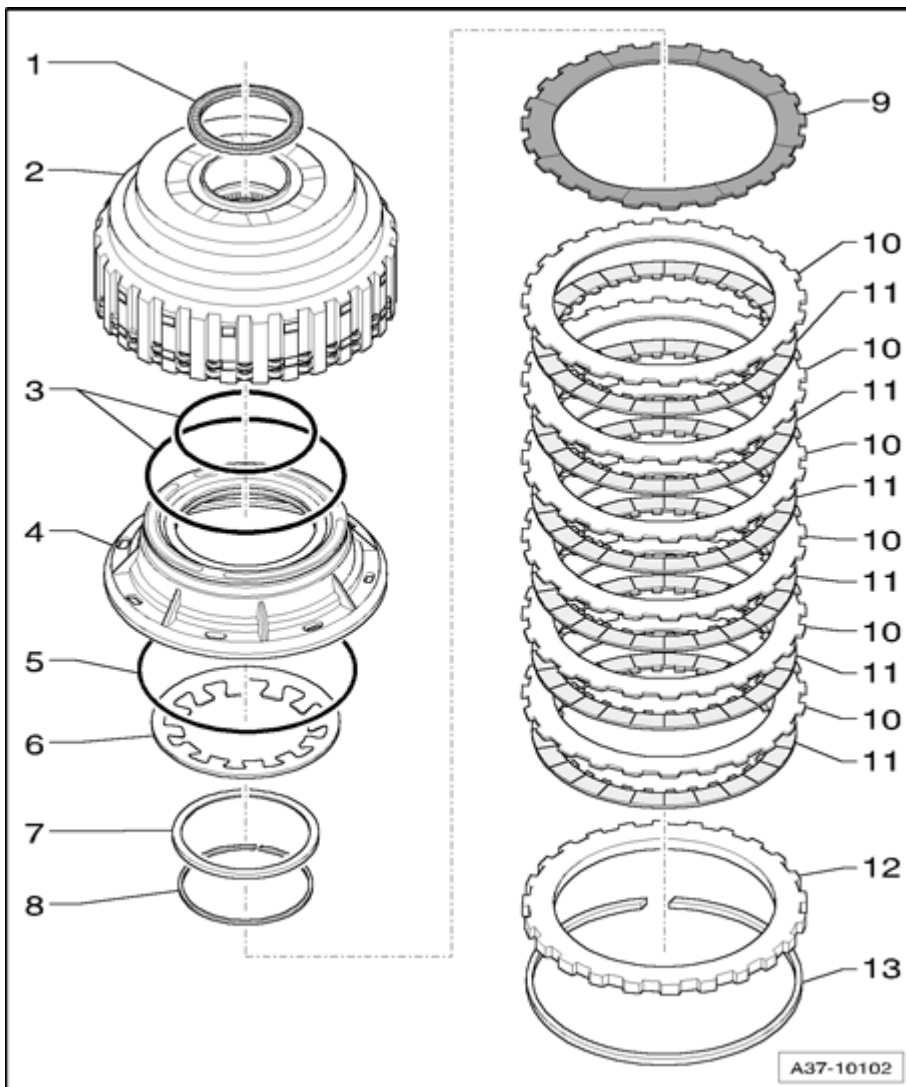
Clutch "B" , Assembly OverviewCourtesy of VOLKSWAGEN UNITED STATES, INC.
